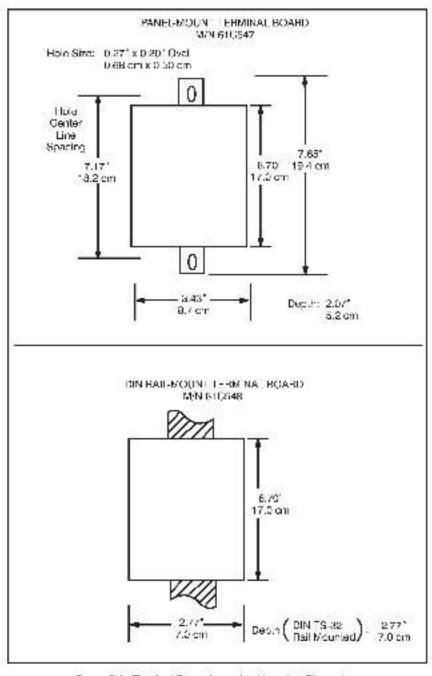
Terminal Board Assembly Mounting Dimensions
